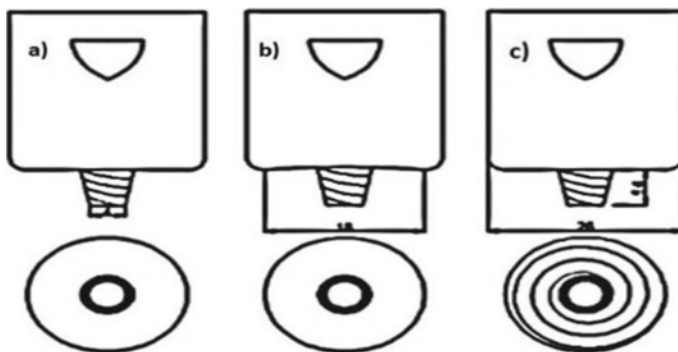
Tool profile a flat shoulder, b concave shoulder and c threaded shoulder
